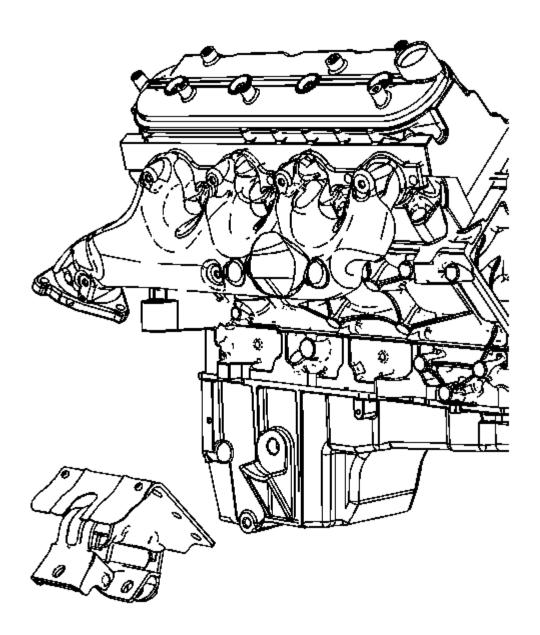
View Of Engine Mount Courtesy of GENERAL MOTORS CORP.
